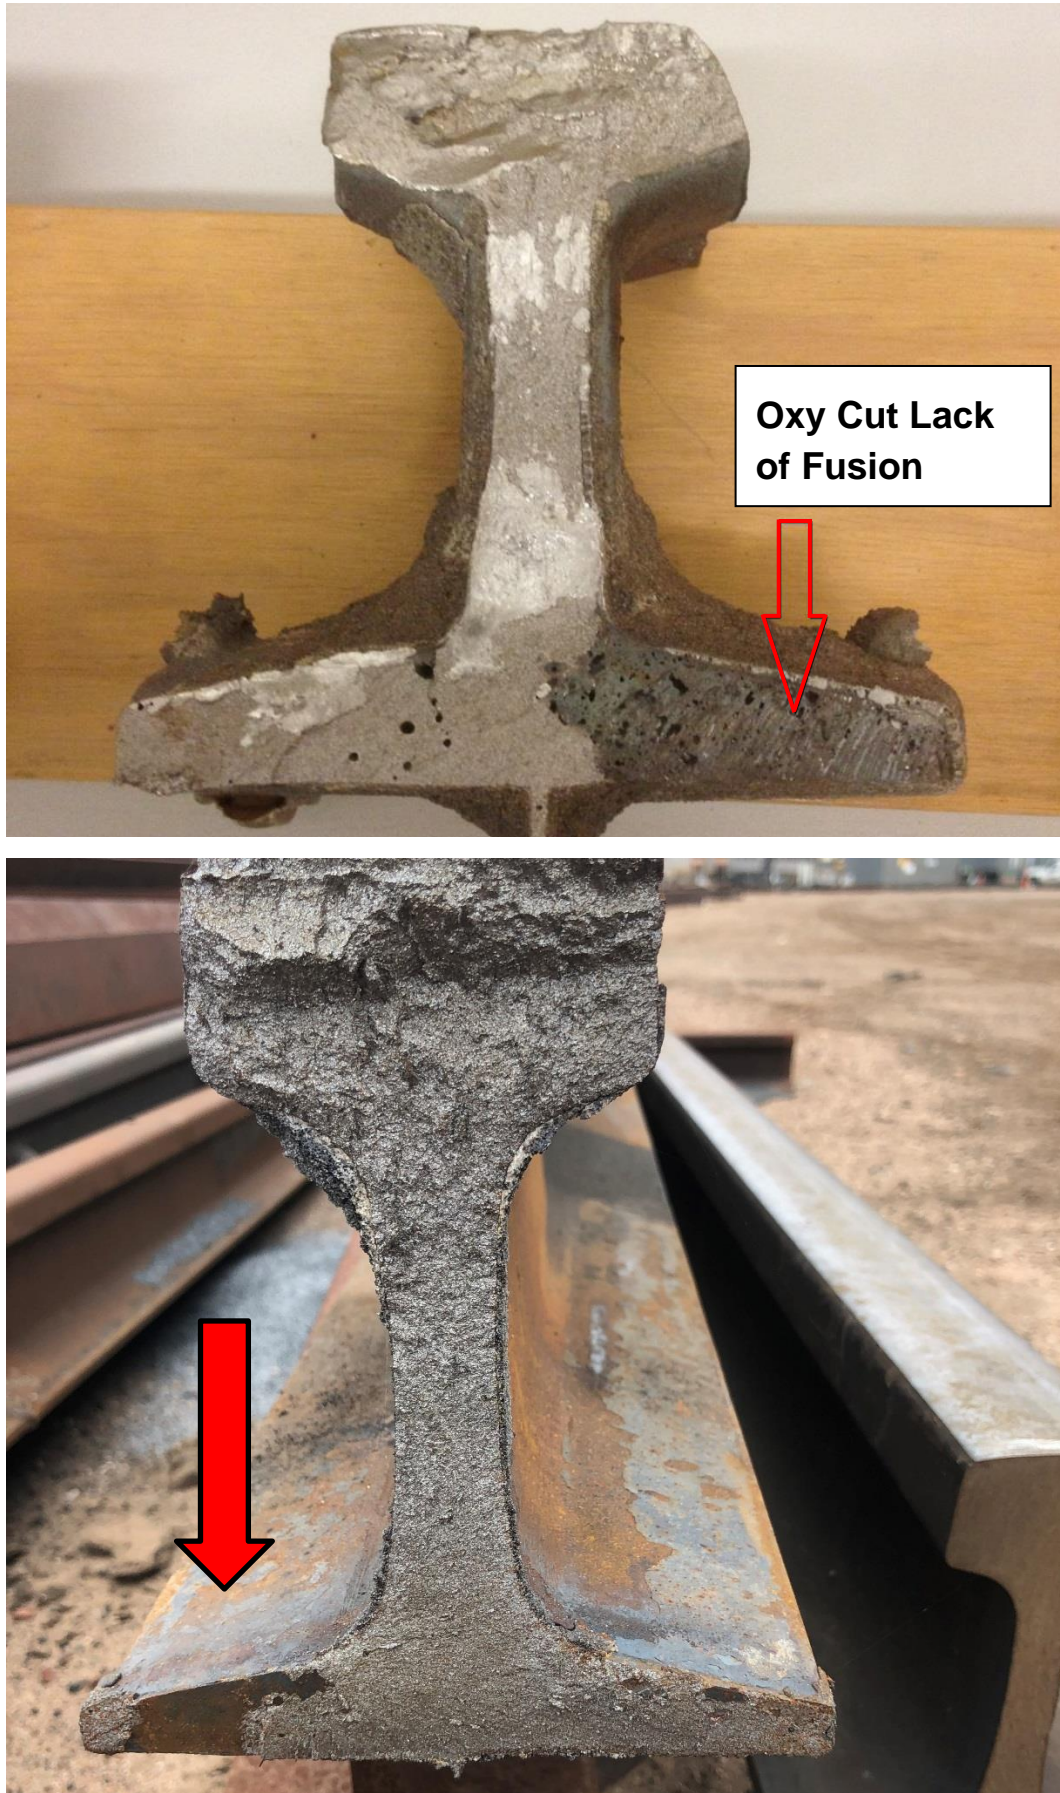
Rail Weld Defect (Lack of Fusion)
